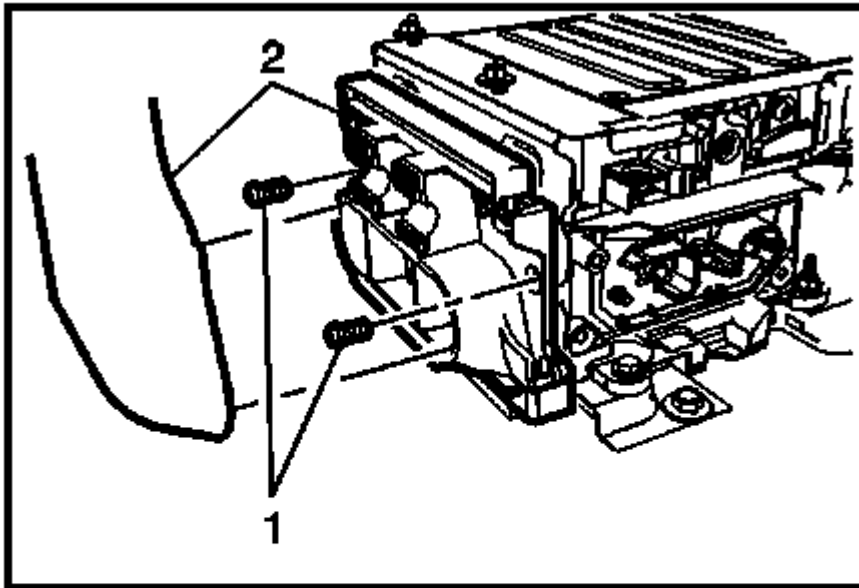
Drive Motor Battery Cooling Blower Outlet Duct Fastener
